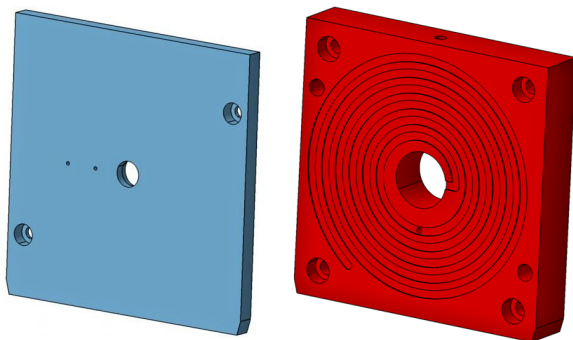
Cavity plates (left – testing plate, right – shaping plate)
